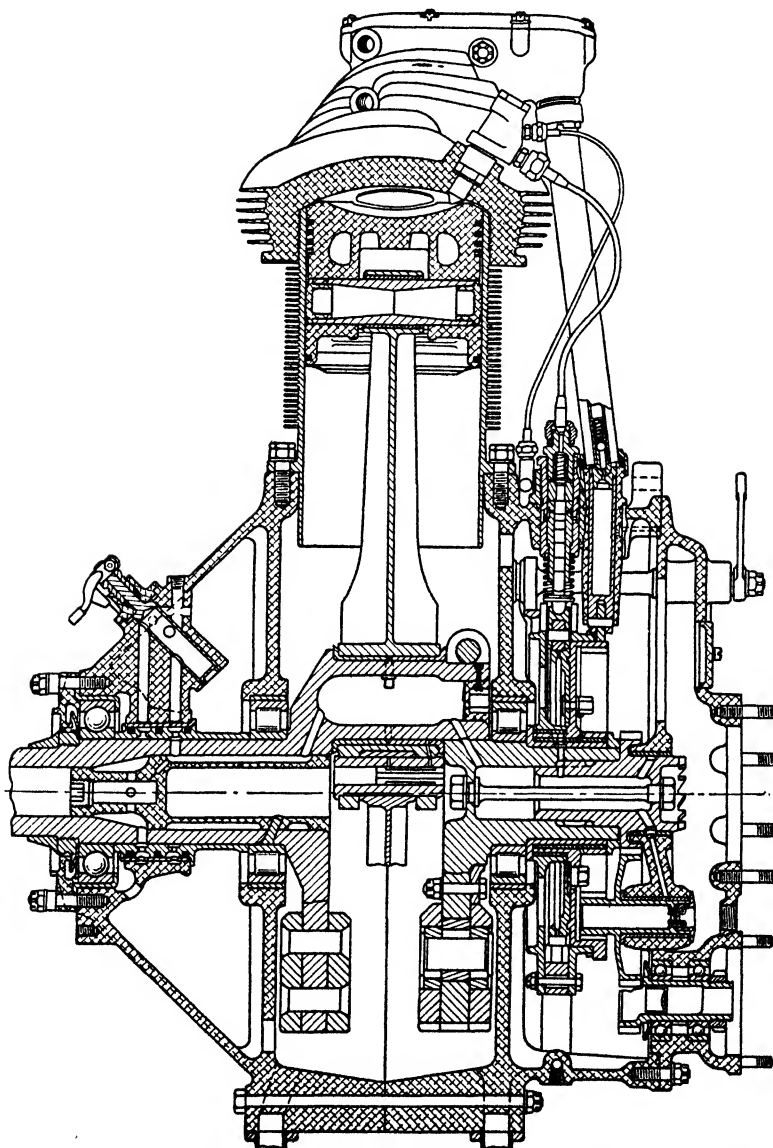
SECTION THROUGH CRANKSHAFT AXIS OF GUIBERSON AIRCRAFT ENGINE.
